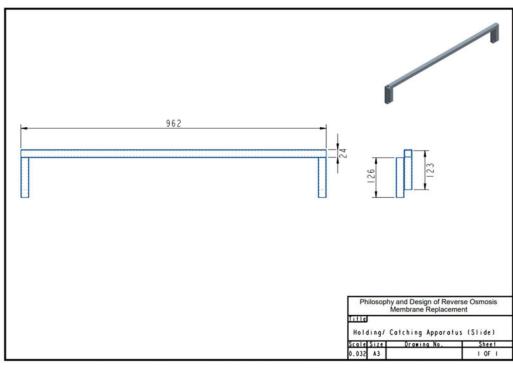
Engineering Drawing: Holding/ Catching Apparatus Wall (Interchangeable w/ Slide)
